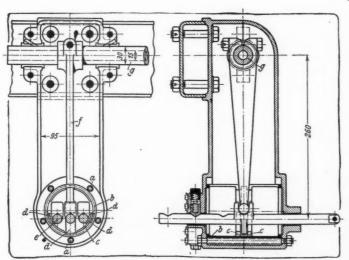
System of locking gearshifting rods in the Ehrhardt 4-wheeldrive military car
